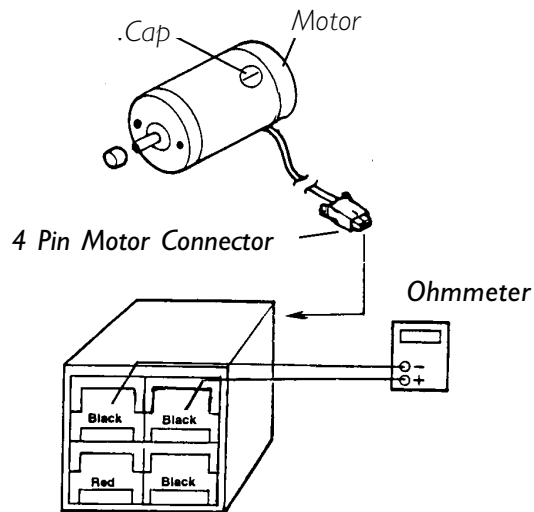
MOTOR BRUSH INSPECTION
